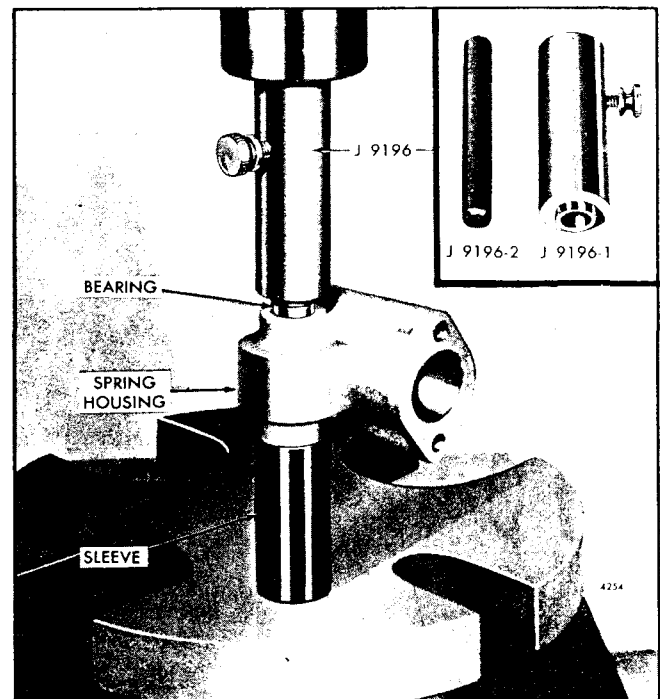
Installing Speed Control Shaft Bearing in Spring Housing
